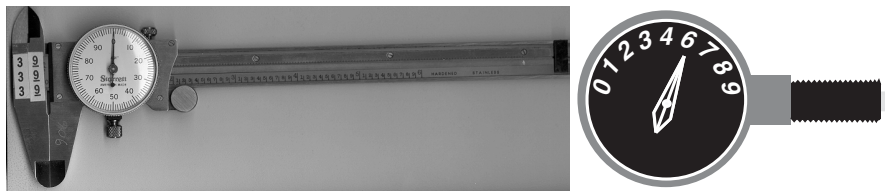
Vernier Caliper & Dial Gauge Indicator
